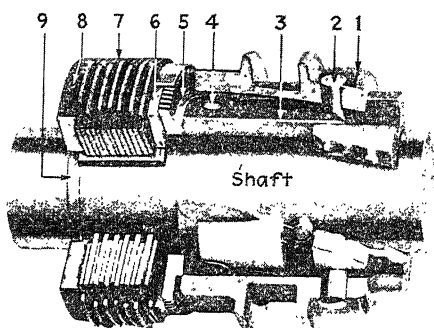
B.—The Pullmore multiple-disk clutch. (Courtesy of The Rockford Drilling Machine Co.)
